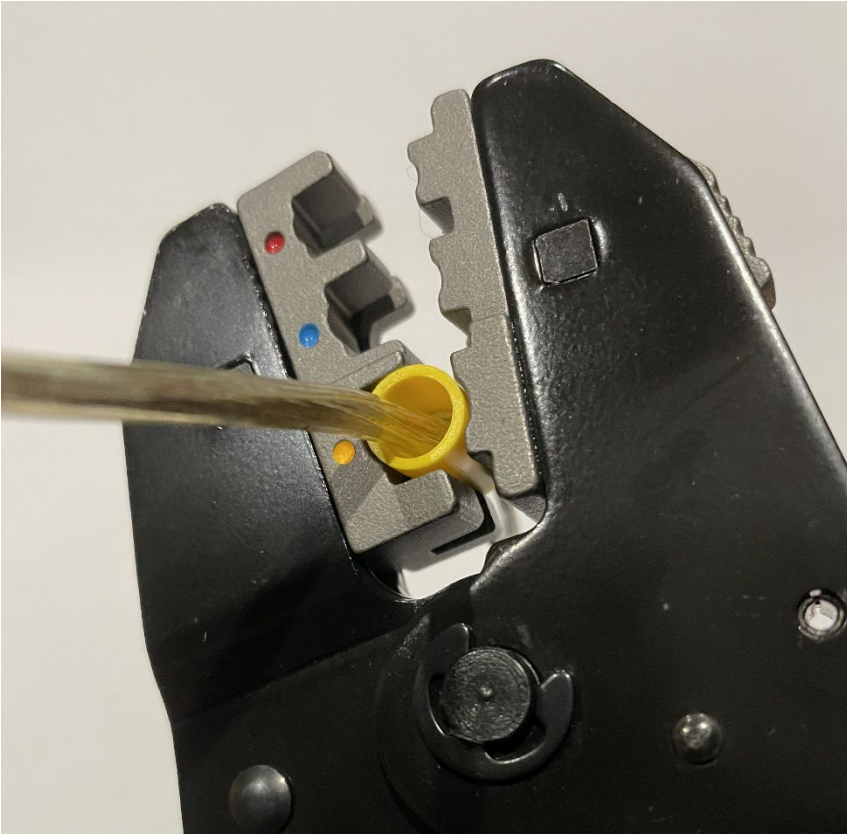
at left shows the left side of the tool, with a crimp in position in the tool and with a wire inserted, ready to be crimped.
